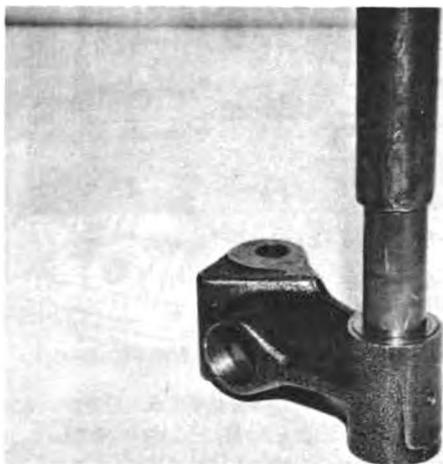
(N10403). Remove The Bushing From The Cam Follower.
